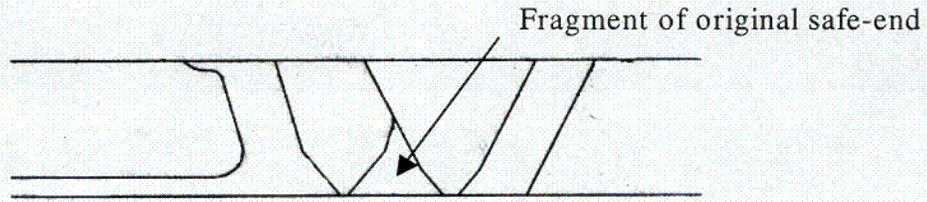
Nominal weld configuration for nozzle to safe-end weld N2B. This drawing shows the fragment of the original safe-end that remains in the component.
